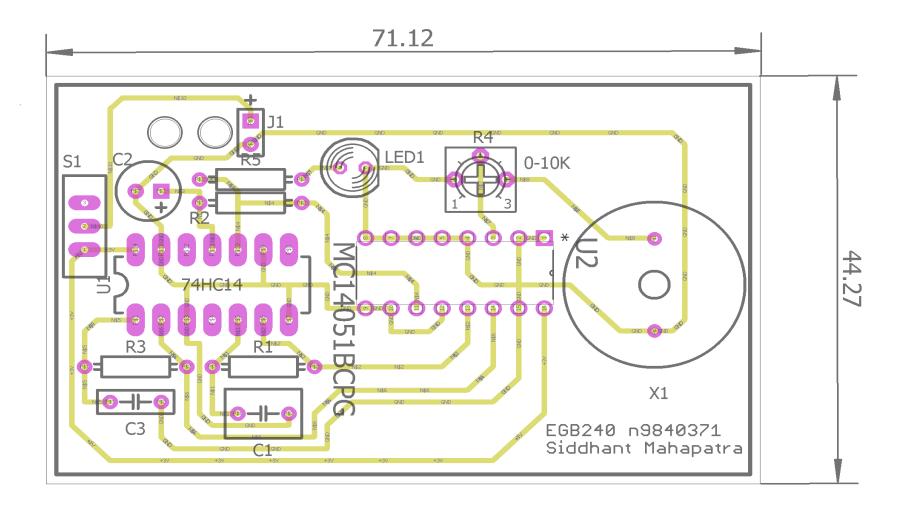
PCB layout of alarm circuit (component side-view) showing overall board dimensions.
